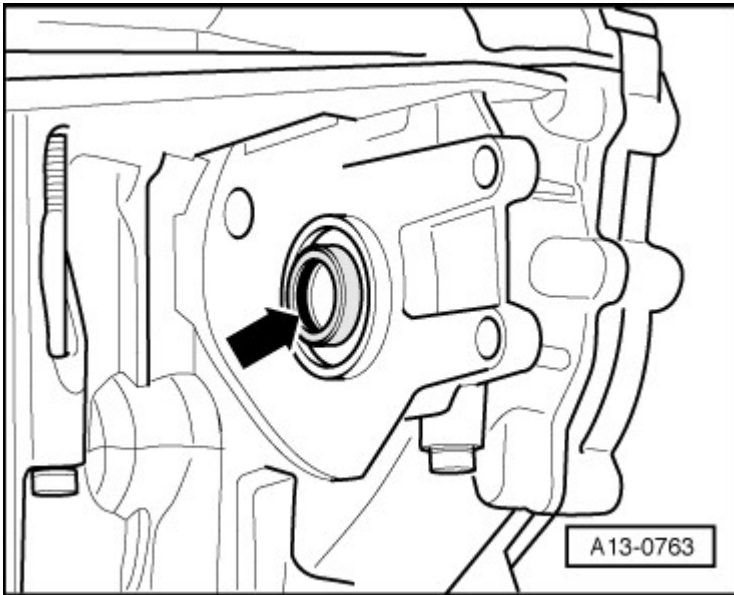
Checking Whether O-Ring Is Inserted In Power Steering Pump Input Shaft
